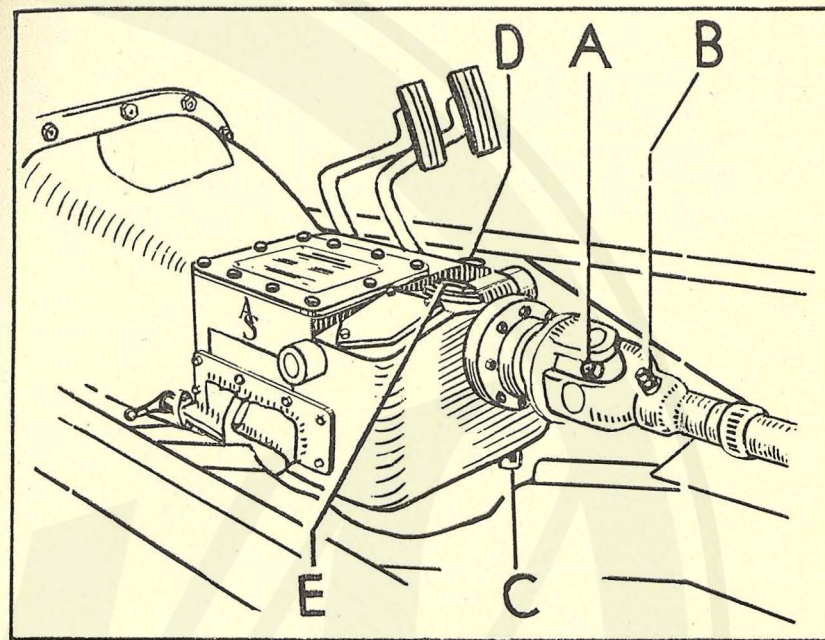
A, lubricator for universal joint (front end of propeller shaft); B, sliding joint lubricator; C, gear box drain plug; D, dip-stick; E, gear box filler plug.
